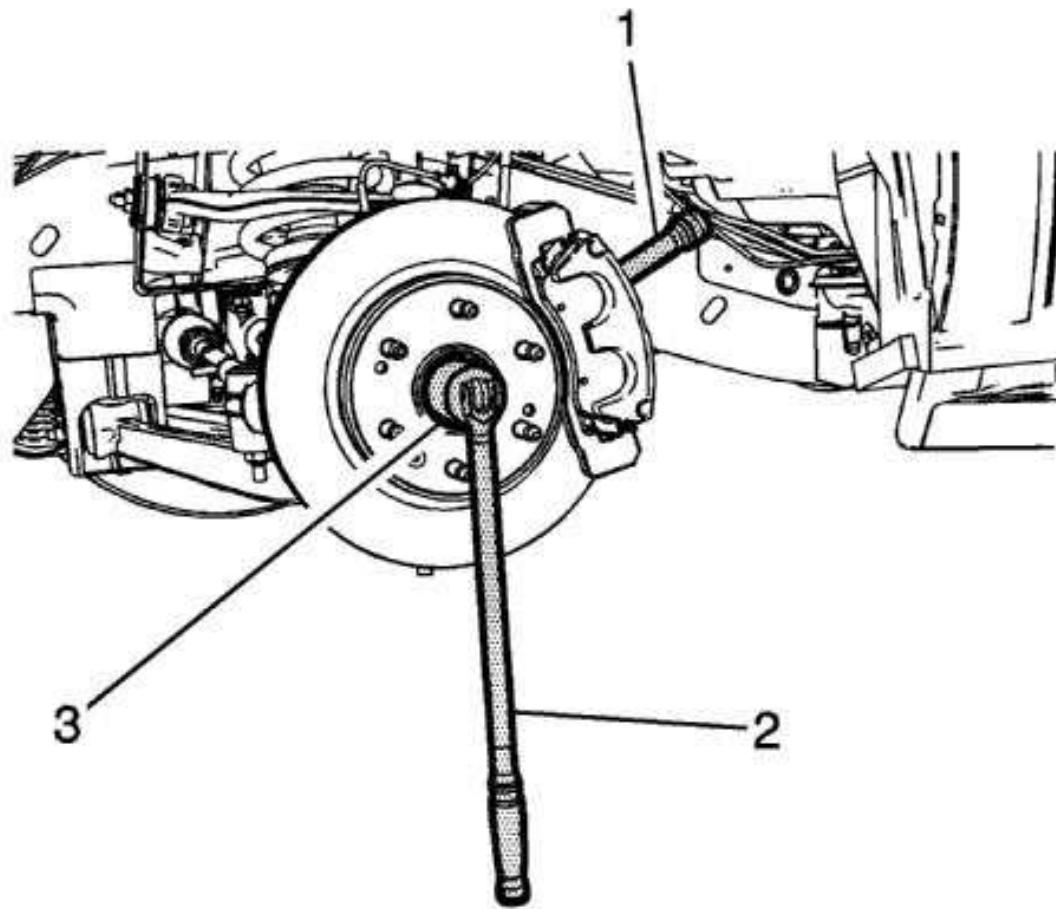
Loosening Axle Retaining Nut With A Breaker Bar And Correct Sized Socket
